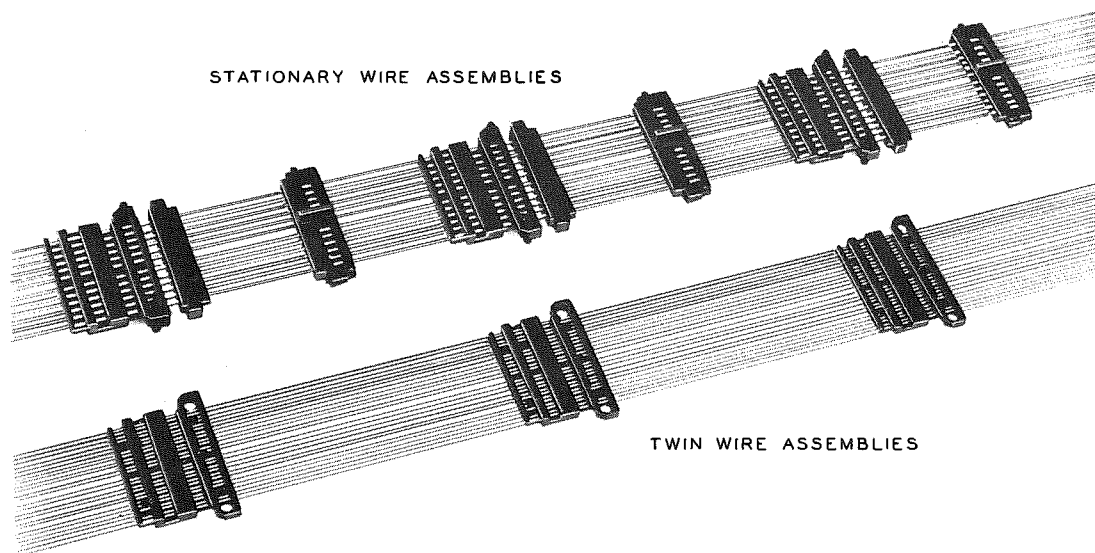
Molded Spring Assemblies Before Cutting to Length
